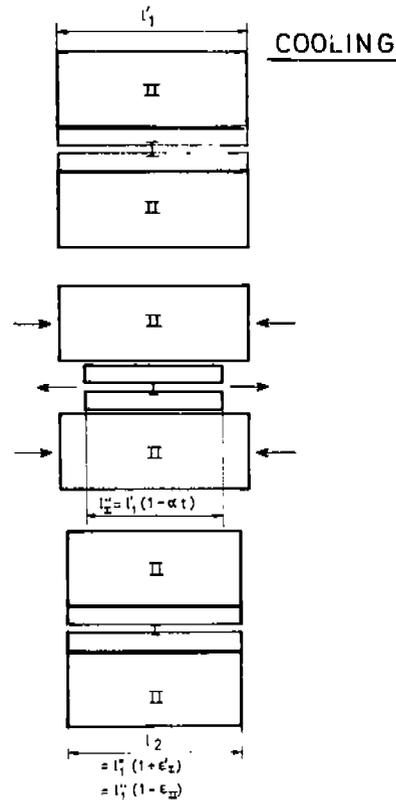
WELDING OF WIDE OR STIFF SPECIMENS ENTAILS DURING COOLING PLASTIC STRAINING IN TENSION.
